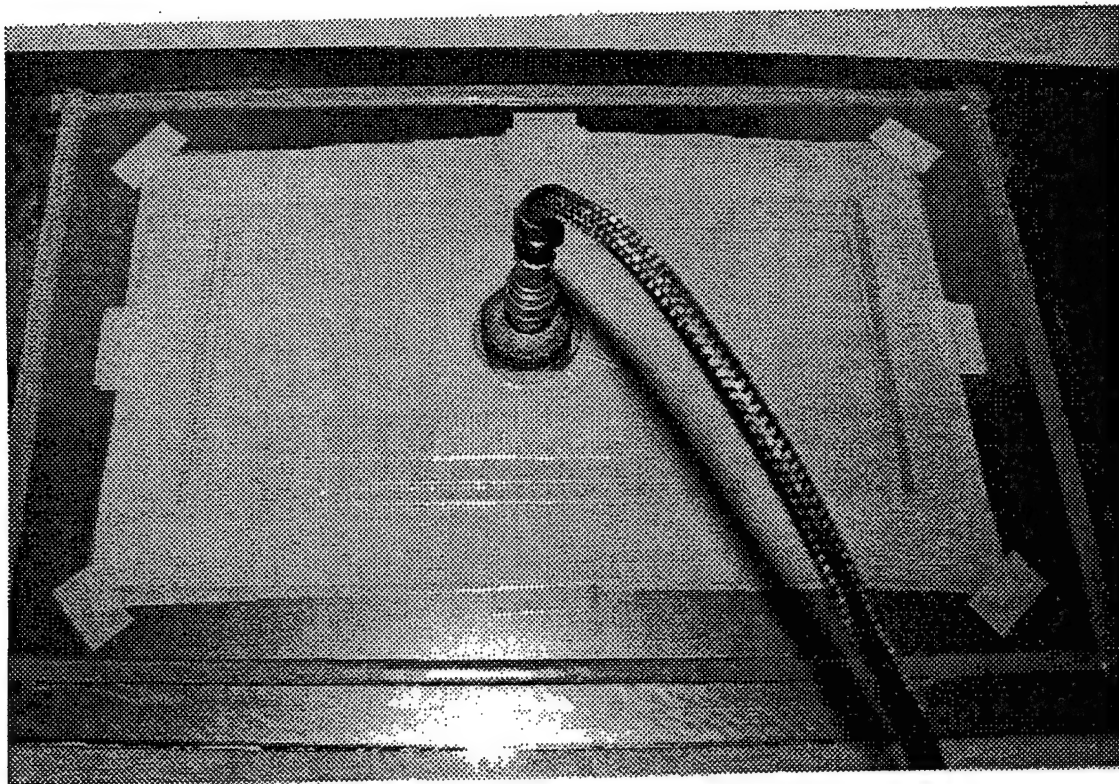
Laboratory Vacuum Molding Trial of NPE 2916.
